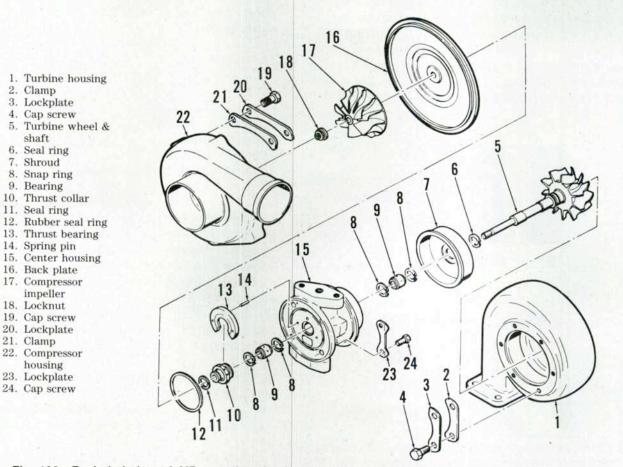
Exploded view of AiResearch turbocharger used on TW-15, TW-25 and TW-35 models.
